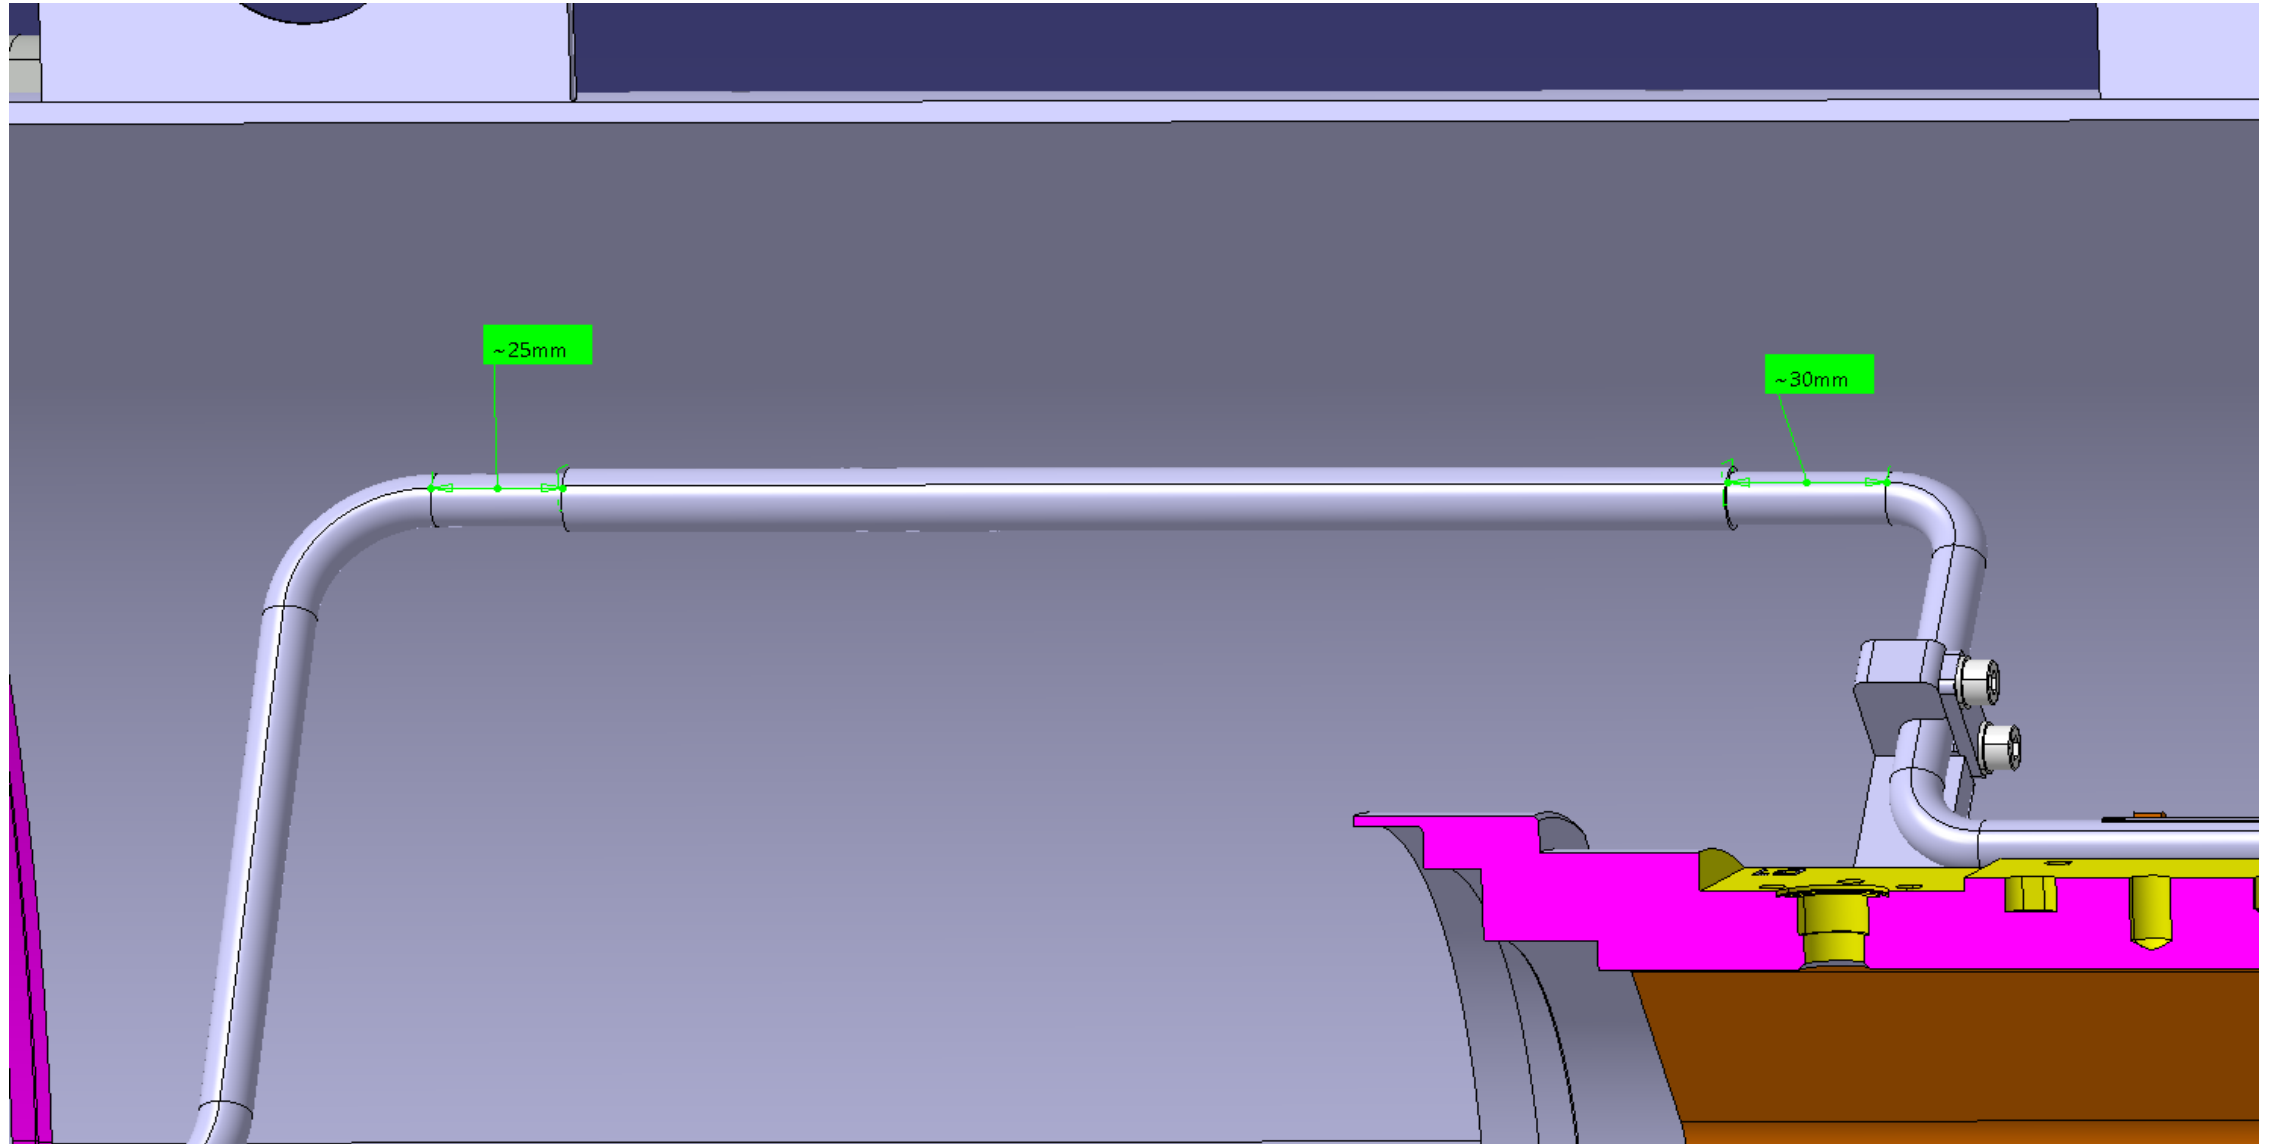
BPM cooling tube and connection cuts and welds to be made
